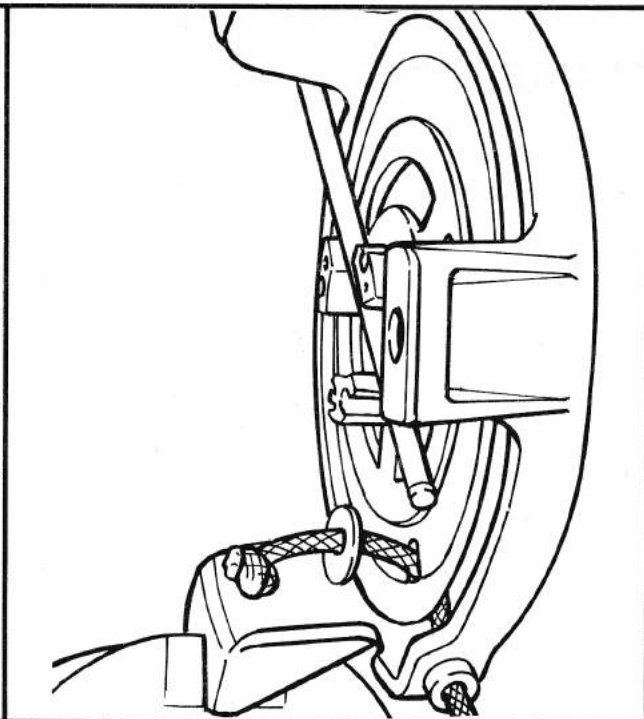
METHOD OF HOLDING PULLEY
